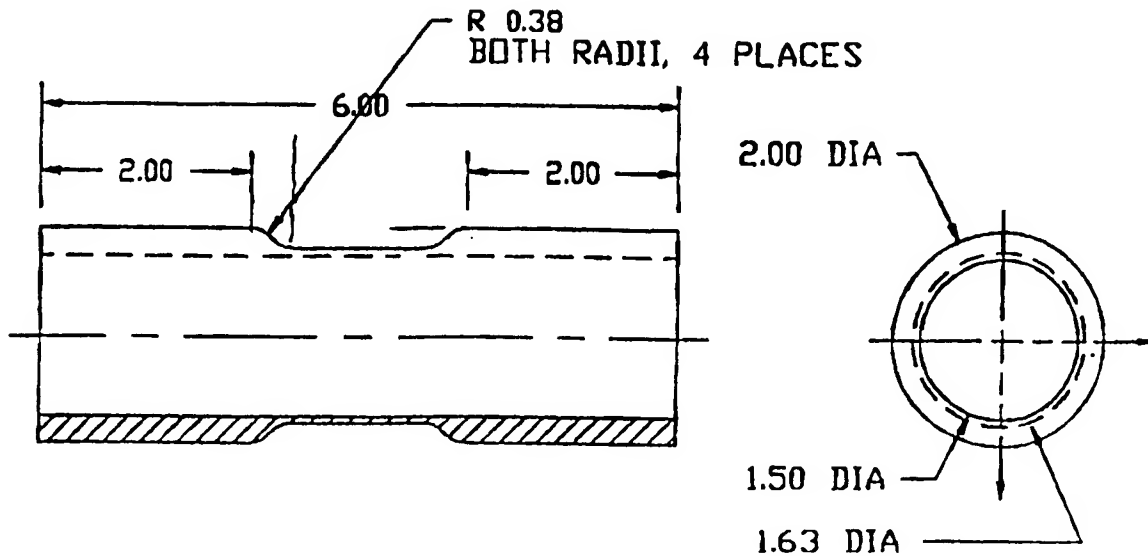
A sketch of the biaxial specimen. The units for the dimensions are inches.
